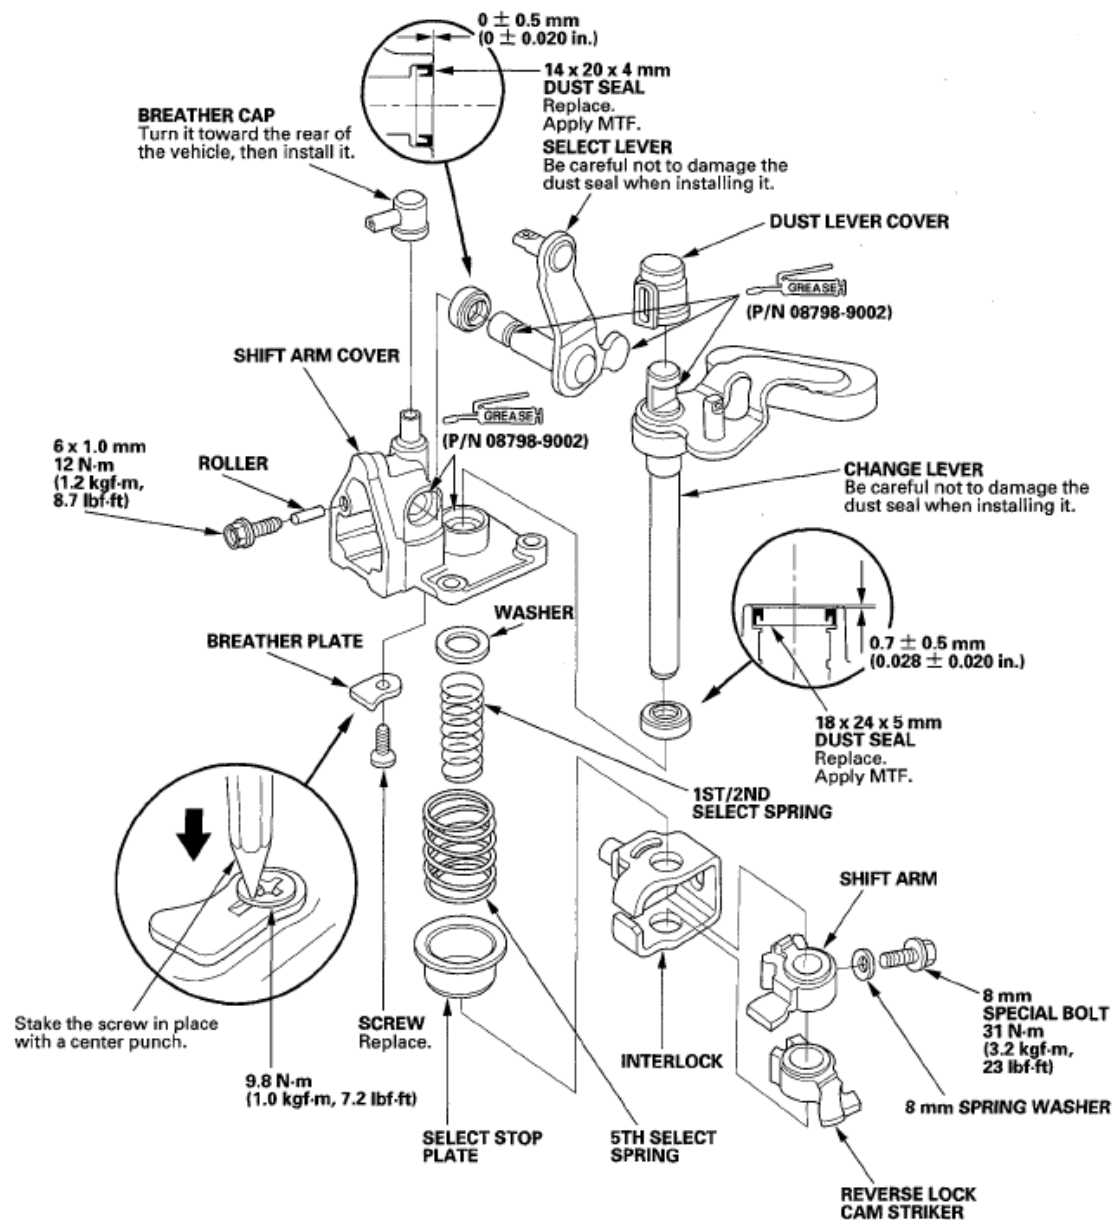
Identifying Change Lever Assembly With Torque Specifications
